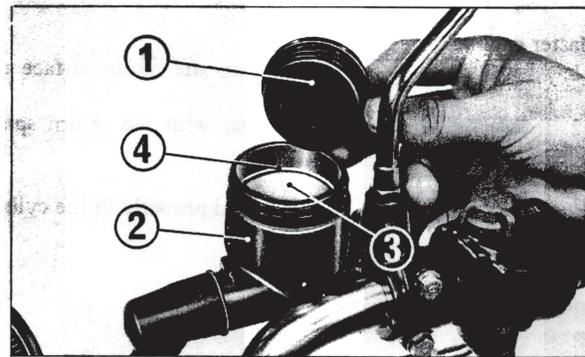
(1) Diaphragm (3) Brake fluid
